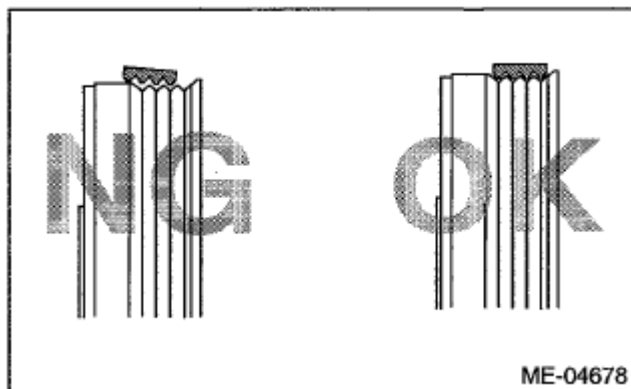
Identifying Correct And Incorrect Installation Position Of Rear Side Belt (A/C Compressor Pulley)
